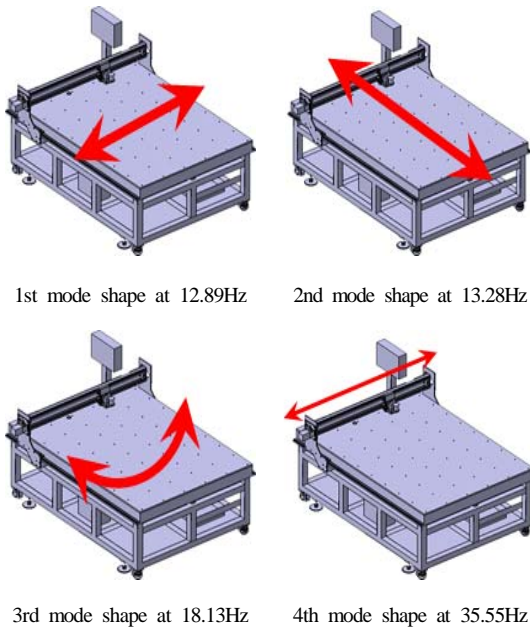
Mode shapes of the glass cutting machine from the experiment
